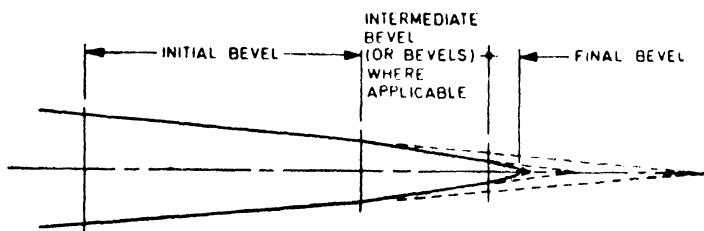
CROSS SECTION PERPENDICULAR TO CUTTING EDGE
